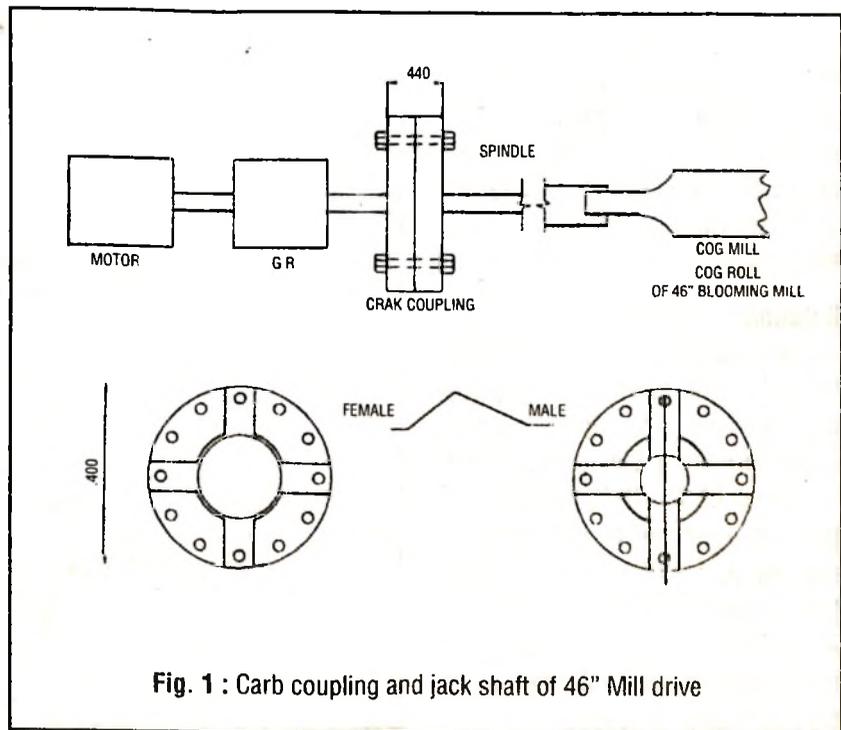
Carb coupling and jack shaft of 46" Mill drive
